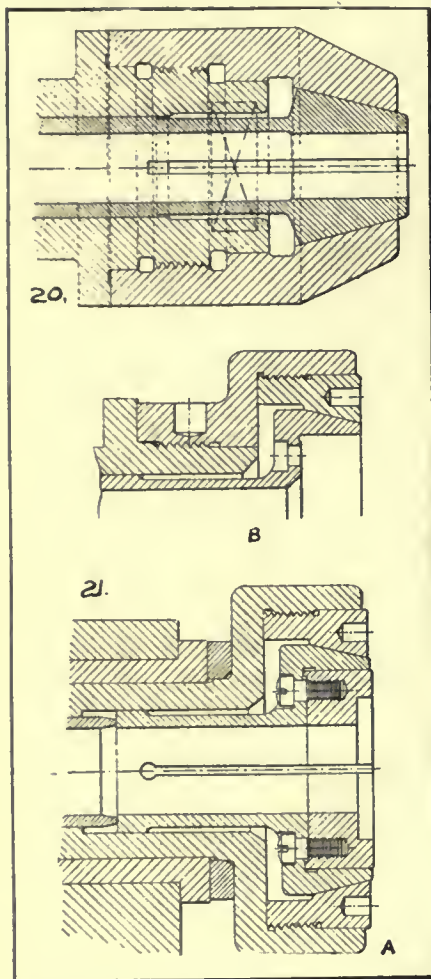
SHOWING CLOSER FOR PUSH-OUT CHECK OF SMALL DIAMETER.
